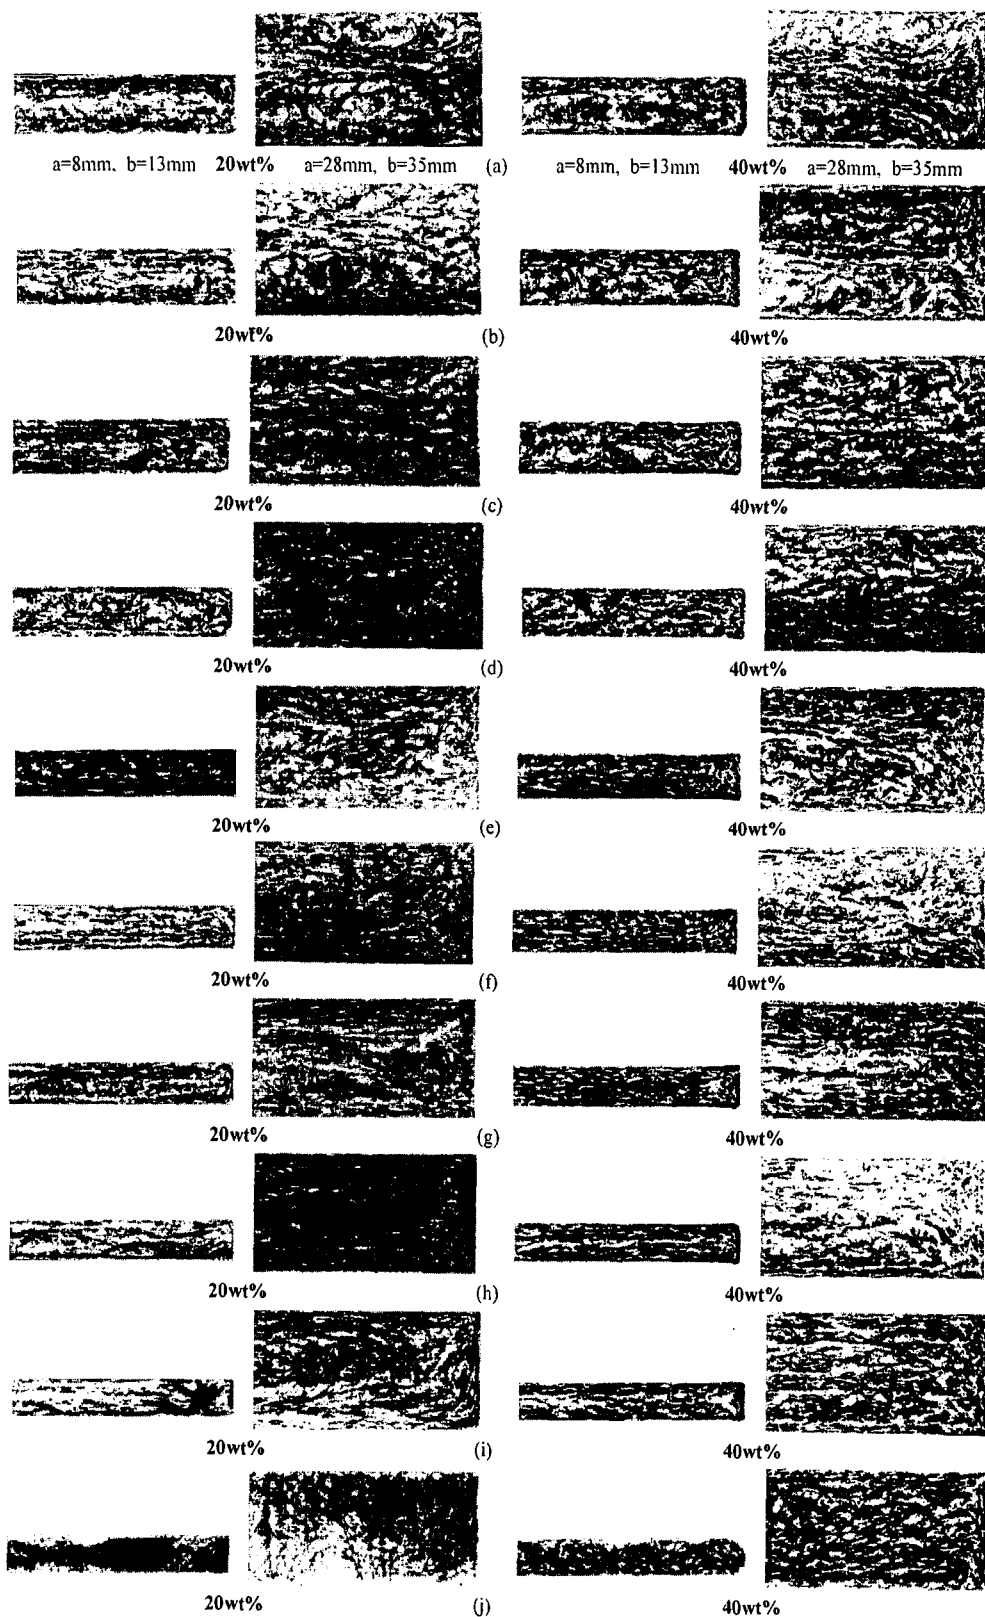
Soft x-ray photograph of compression molded specimen I and II.
